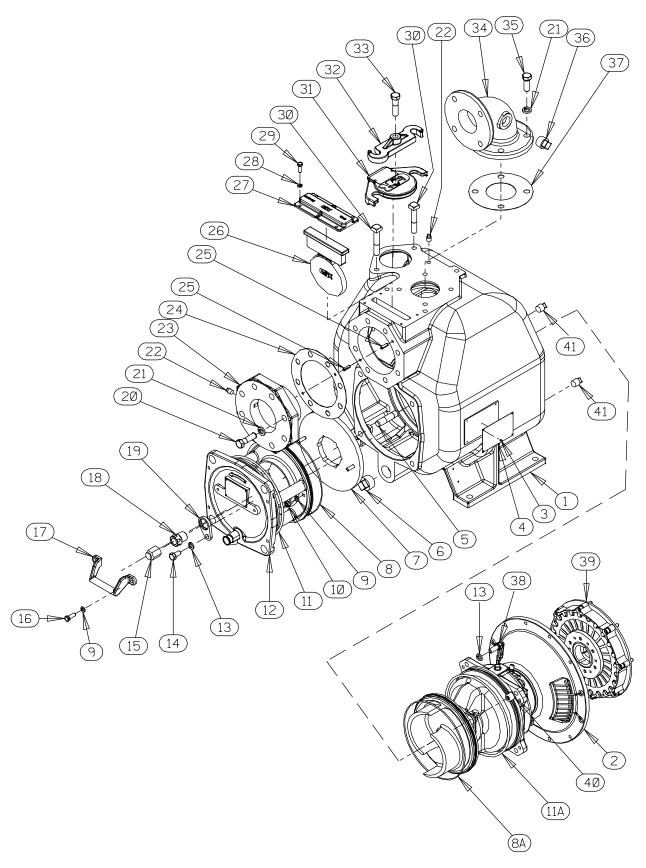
V3A60-(SAE 4/10) Pump End Assembly
